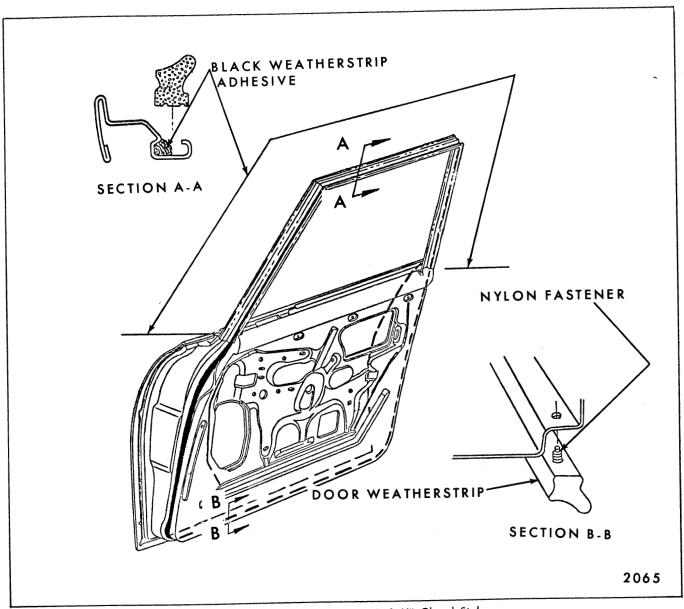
Door Weatherstrip - "A & X" Closed Styles
